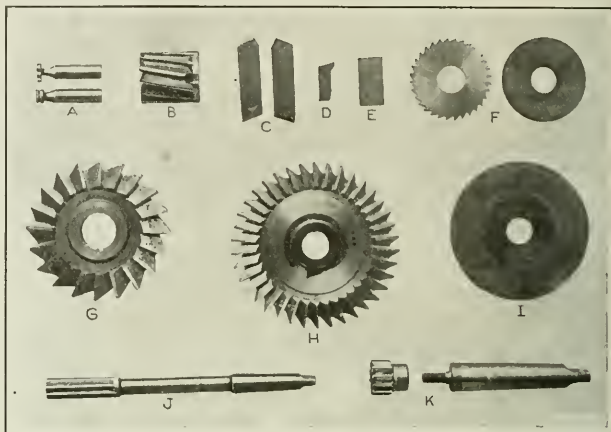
Typical Examples of Tool Bits and Cutting Tools made from Diamond Alloy
